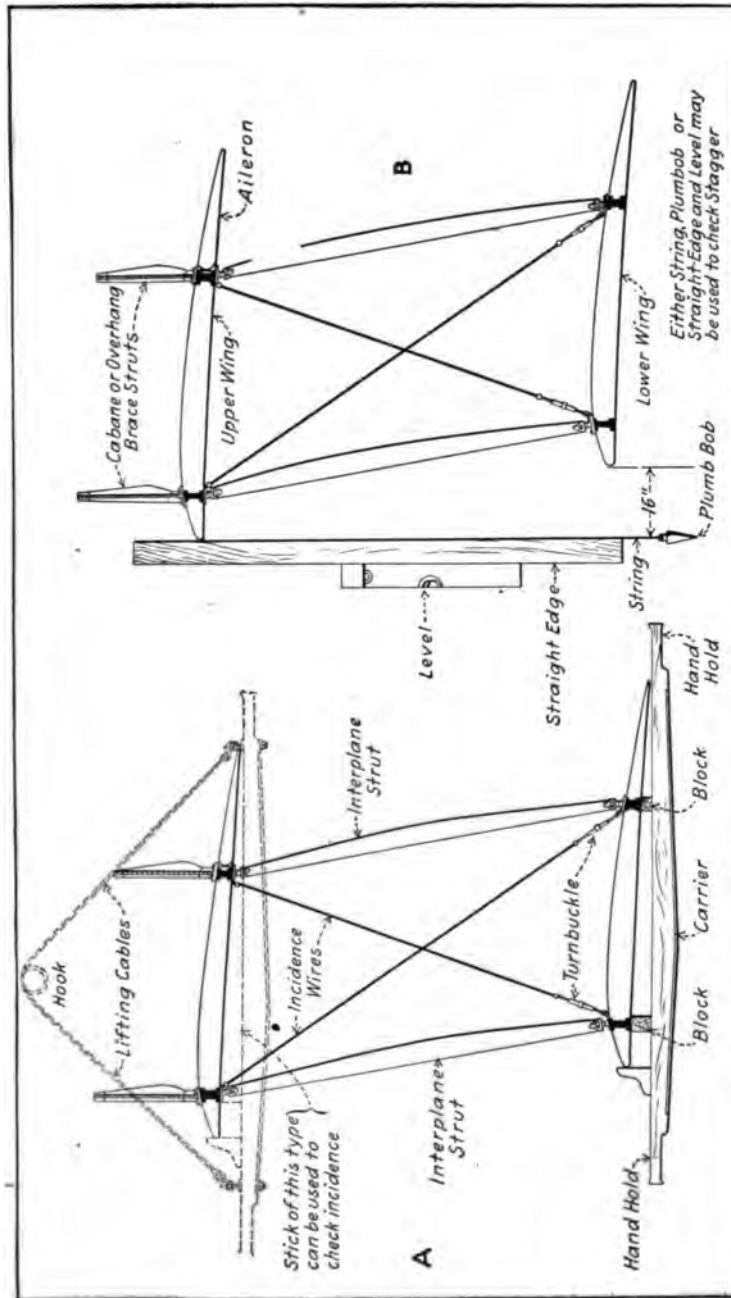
Carrier for Panel Assembly at A and B. How to Test for Stagger.
